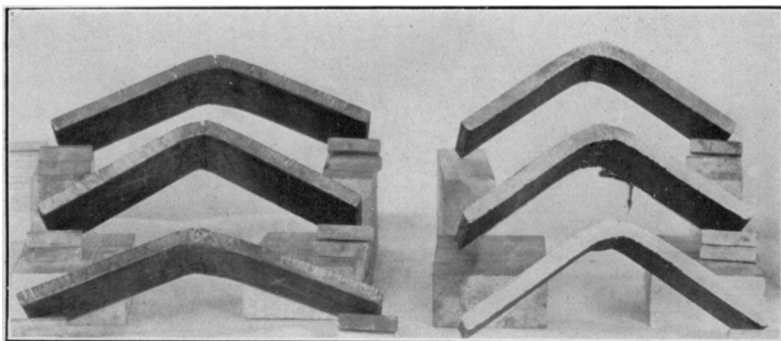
GAS AND ELECTRIC BENT SAMPLES (GAS WELDS AT LEFT AND ELECTRIC WELDS AT RIGHT)
